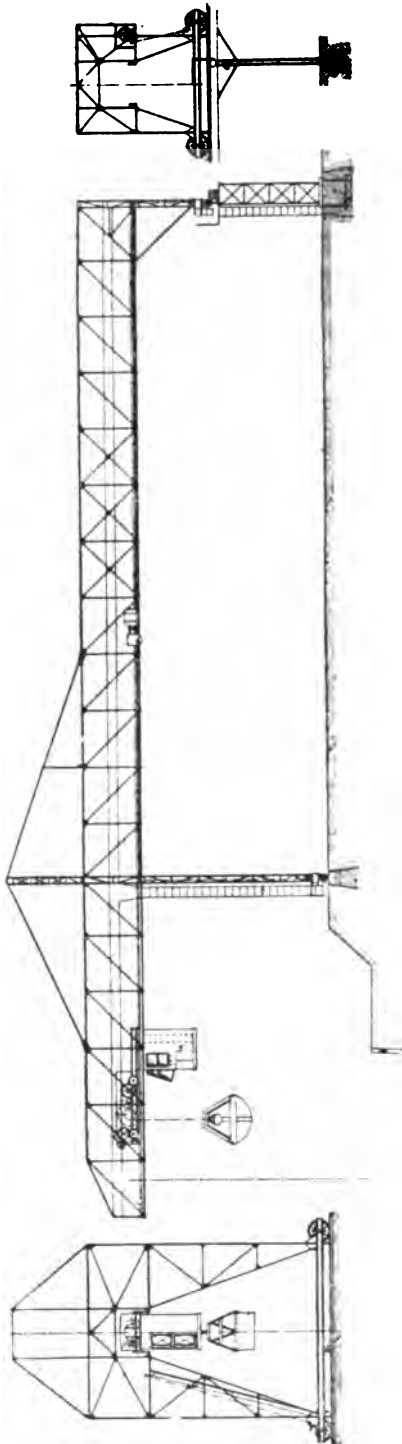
Coal Bridge. Scale, 1 to 300.
